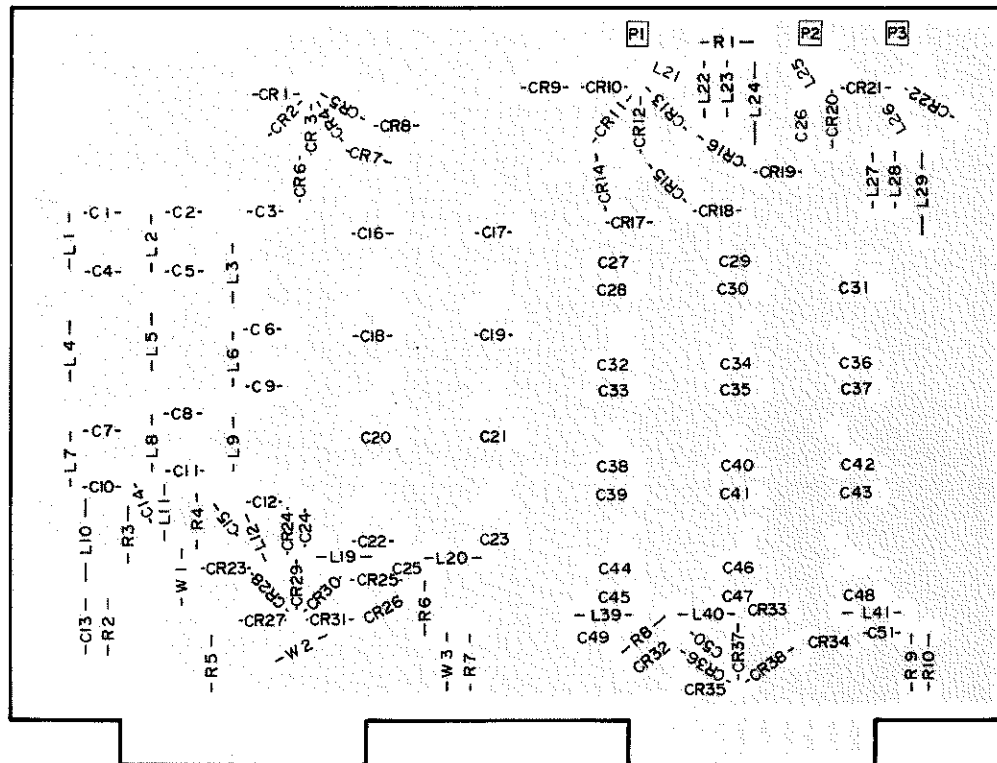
A7 Selectable Filter Board Assembly Component Locations.
